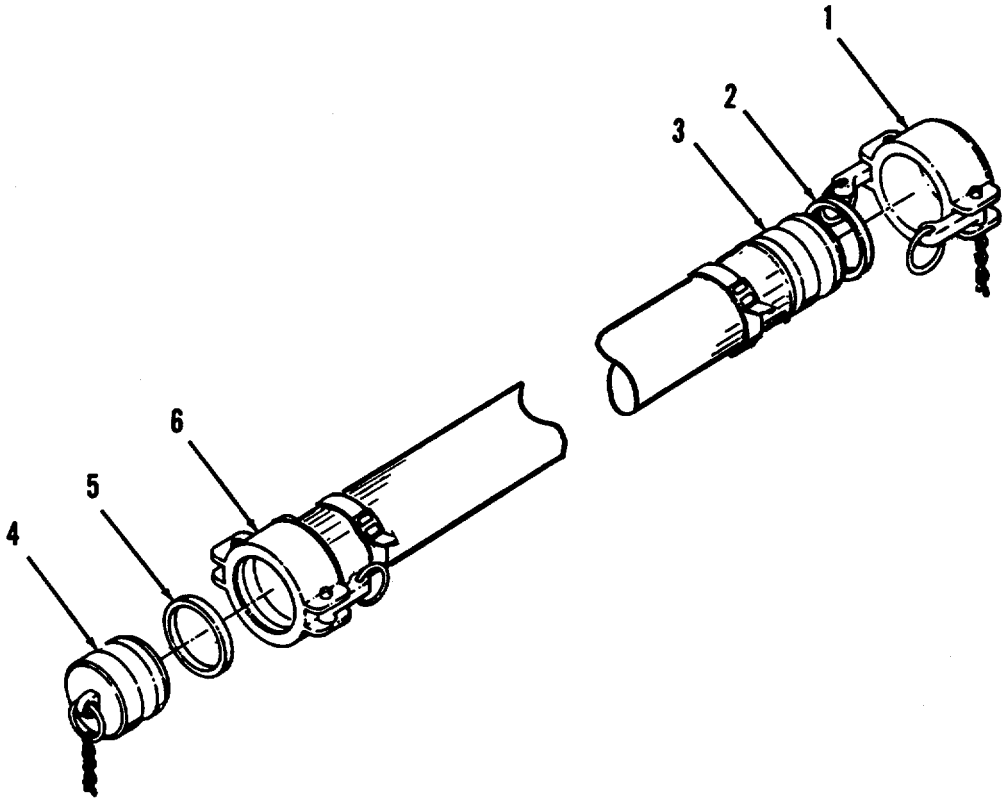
Hose Assembly (Suction and Discharge) Replacement and Repair.
